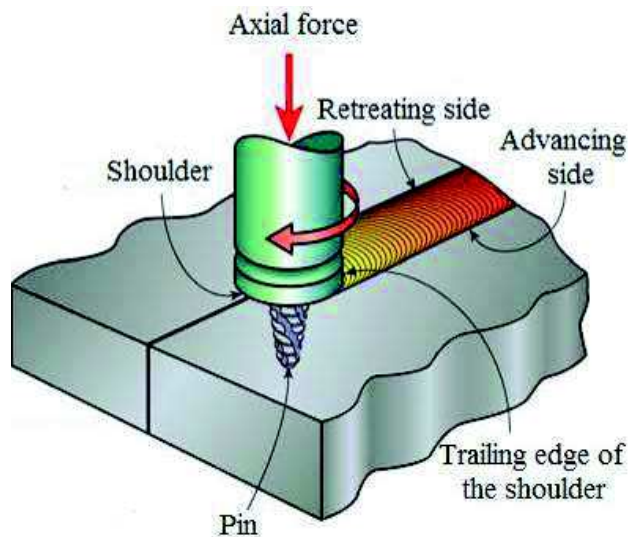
Schematic diagram of friction stir welding [3]
